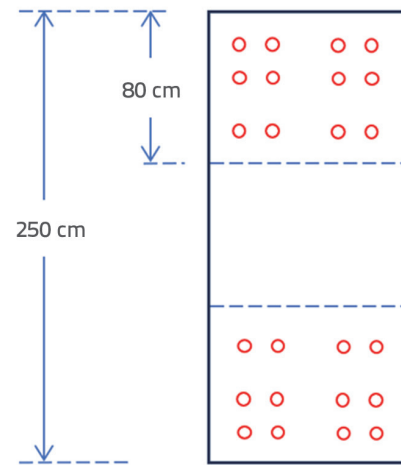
Sketch of the plan view of the revised steel plate for production and testing
